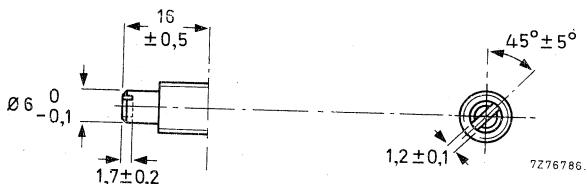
Spindle with screwdriver slot; spindle fully counter-clockwise.
